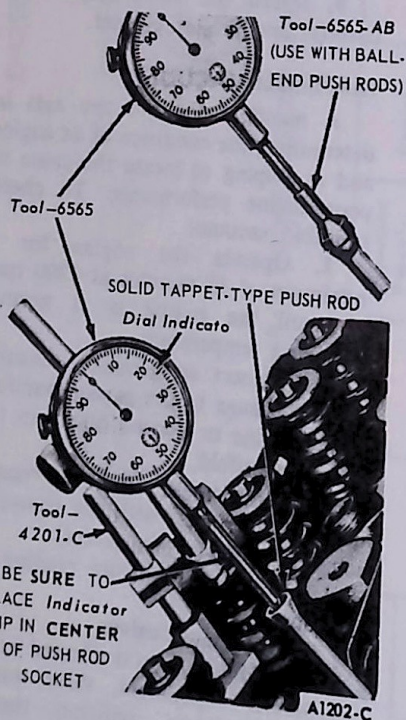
Typical Camshaft Lobe Lift—Hydraulic Valve Lifters—V-8 Engines
